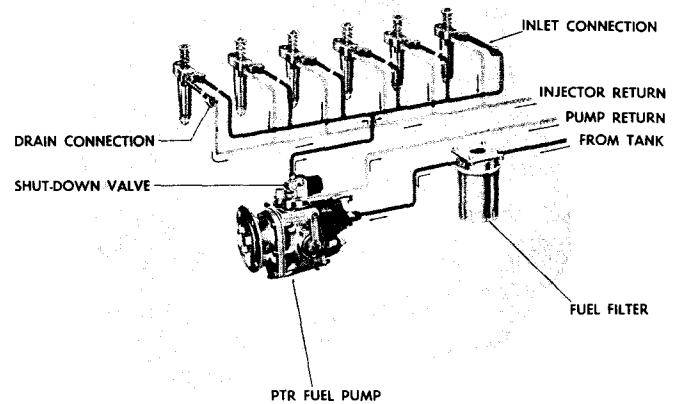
Fuel flow diagram, PT (type R) pump and flange injector FWC-16
